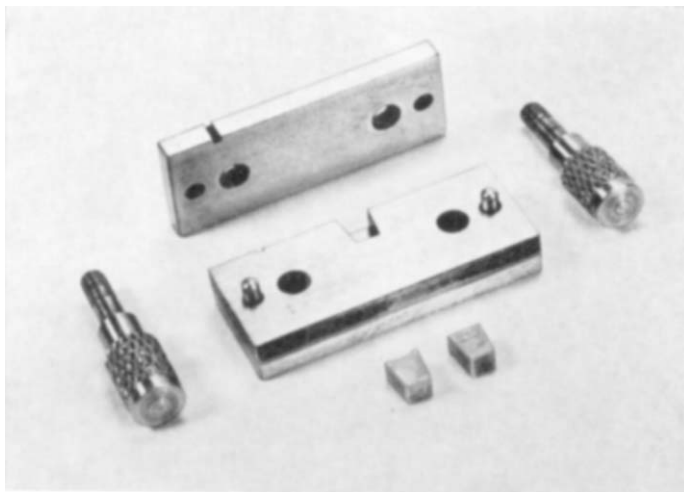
Steel mold used in preparation of the amalgam specimens. The mold is partly separated. The two large holes in the steel plates were used in fixing the mold to the condensation balance.
